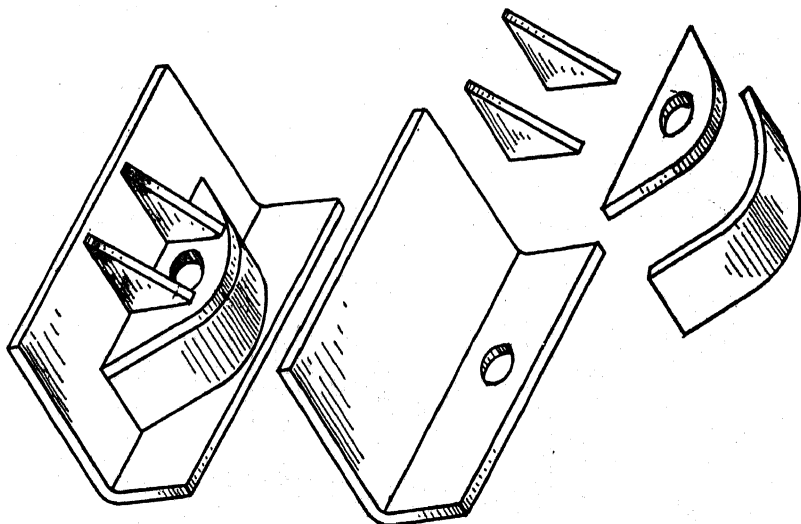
Detail of a base where great rigidity is required. Rolled steel construction affords maximum stiffness with minimum weight.
